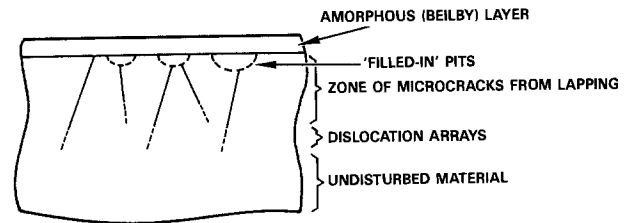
Cross-sectional view of lapping and mechanical polishing defects.
